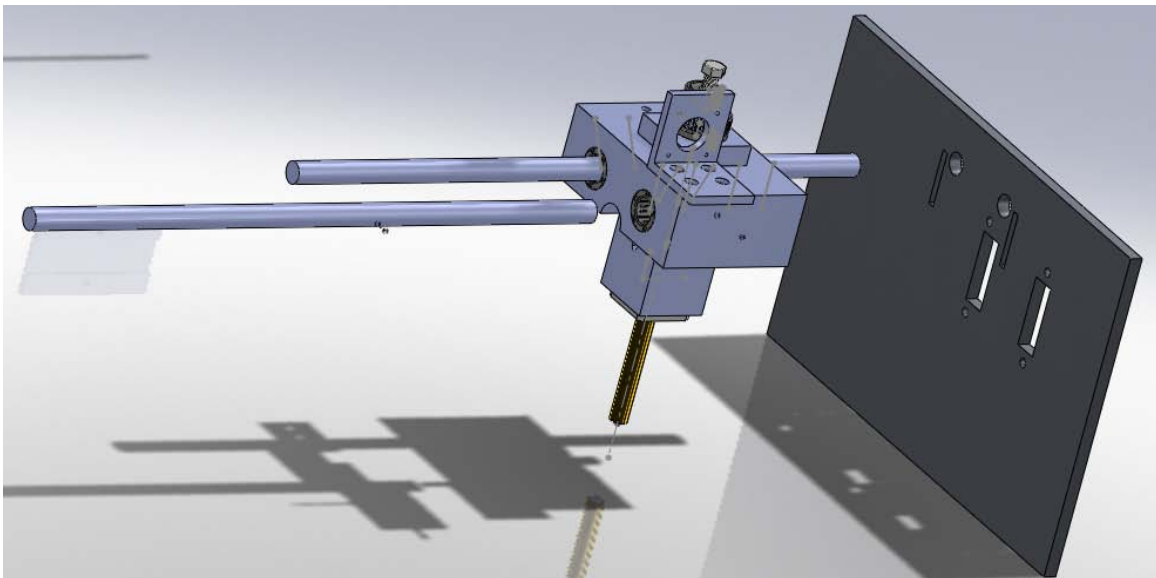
Connection of pin and linear bearing into linear stage
